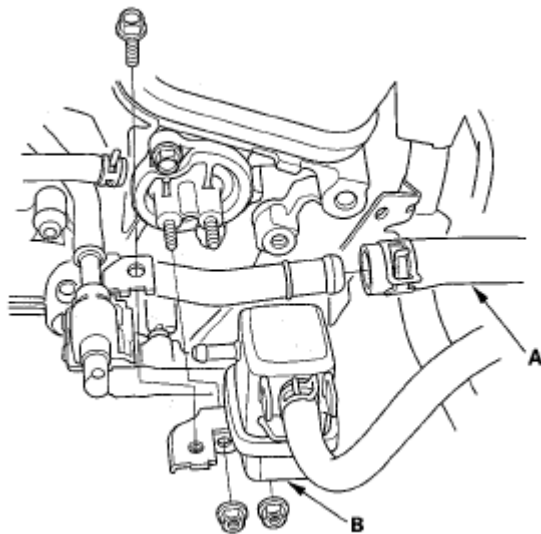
Identifying Heater Hose And Evaporative Emission (EVAP) Canister Purge Valve Joint
